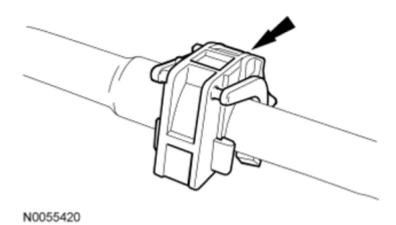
Locating Hose Courtesy of FORD MOTOR CO.
